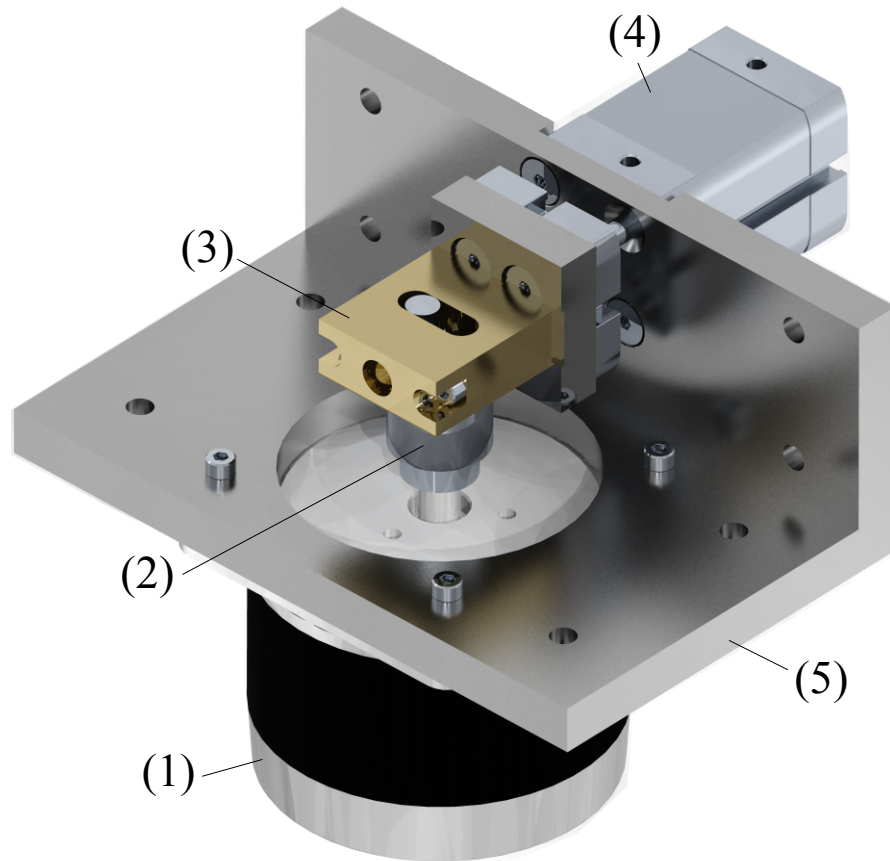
Model of the piston pump, containing (1) stepper motor, (2) crank, (3) sliding yoke, (4) piston-cylinder and (5) support.
